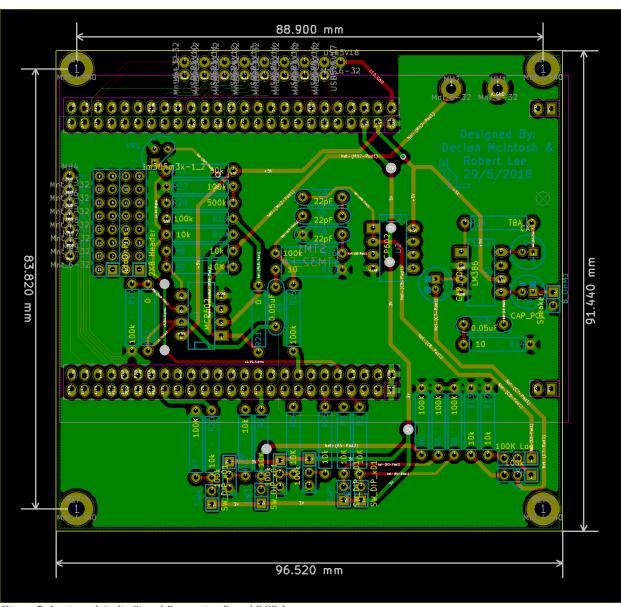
Logic and Audio Signal Processing Board PCB Layout
